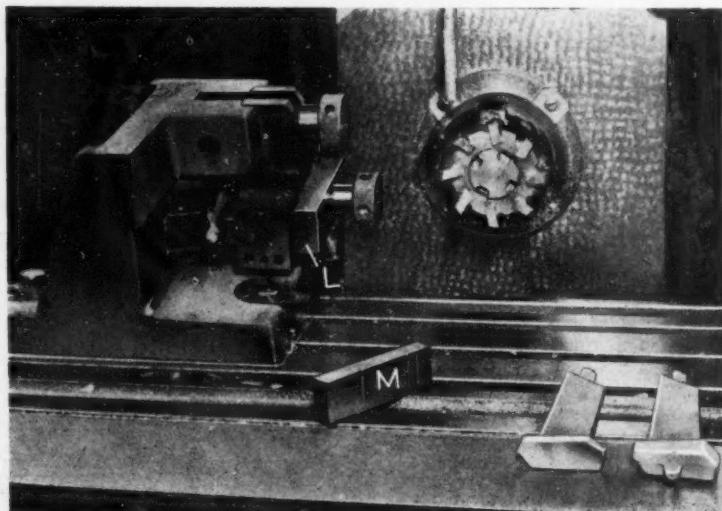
At this Set-up, the End Surface of the Root End of the Blade is Milled Flat, at the Correct Angle to the Aerofoil Portion. The Stepped Block *M* is Employed for Inspection in Conjunction with the Fixture
